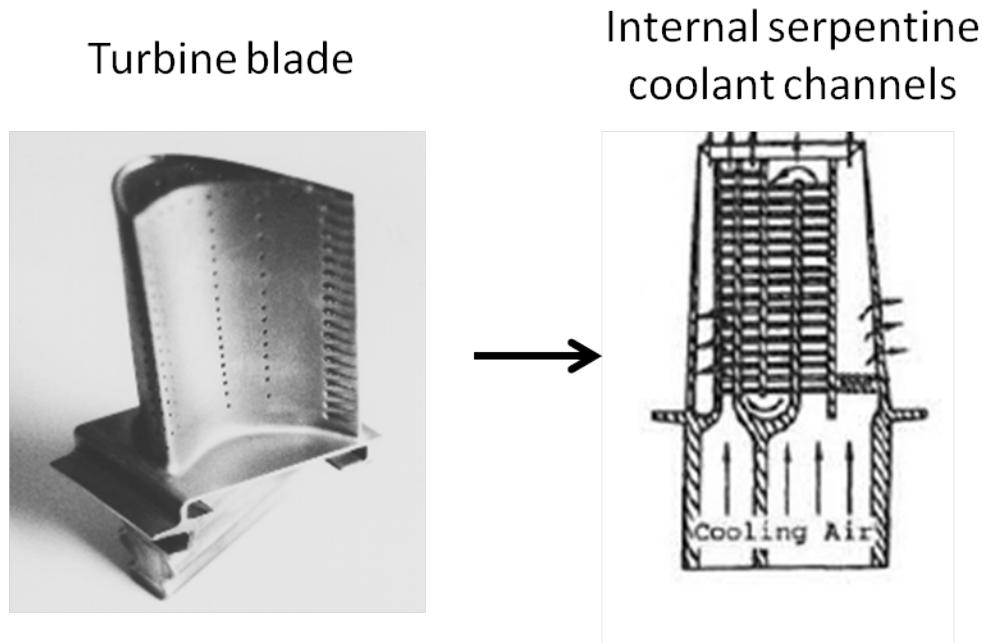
Generic gas turbine blade (left). Cutaway view of internal serpentine coolant channels inside turbine blades (right).
